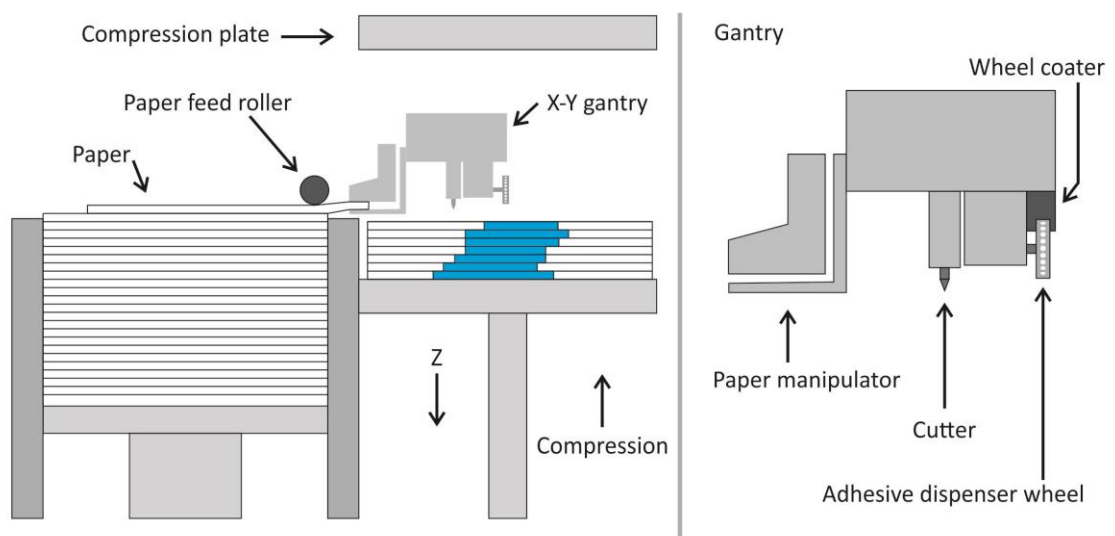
, Mcor machine layout (left), Mcor gantry, including cutter, adhesive dispenser and paper manipulator. figure by author.
